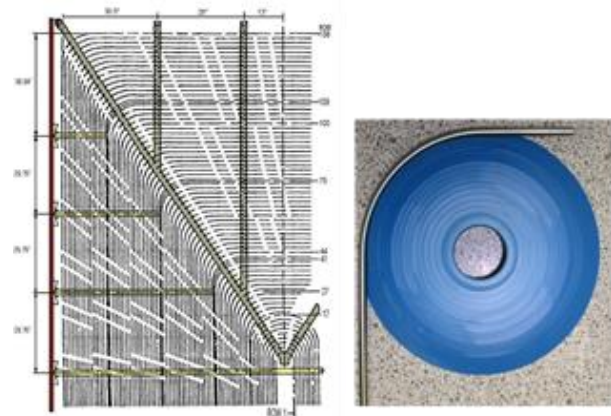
Geometry and arrangement of u-tubes in steam generator and u-tube mock-up bending block.
